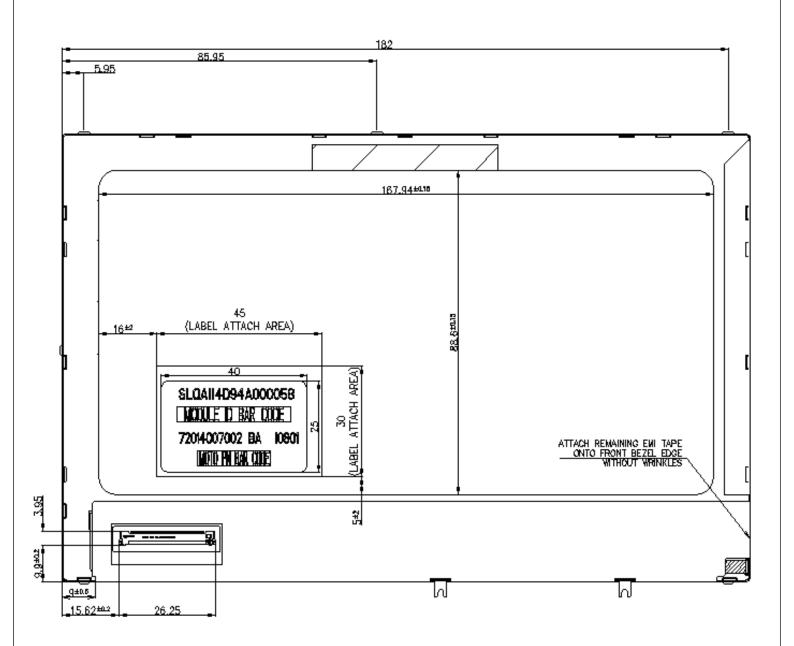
TFT-LCD Module Outline Dimension (Front View)
